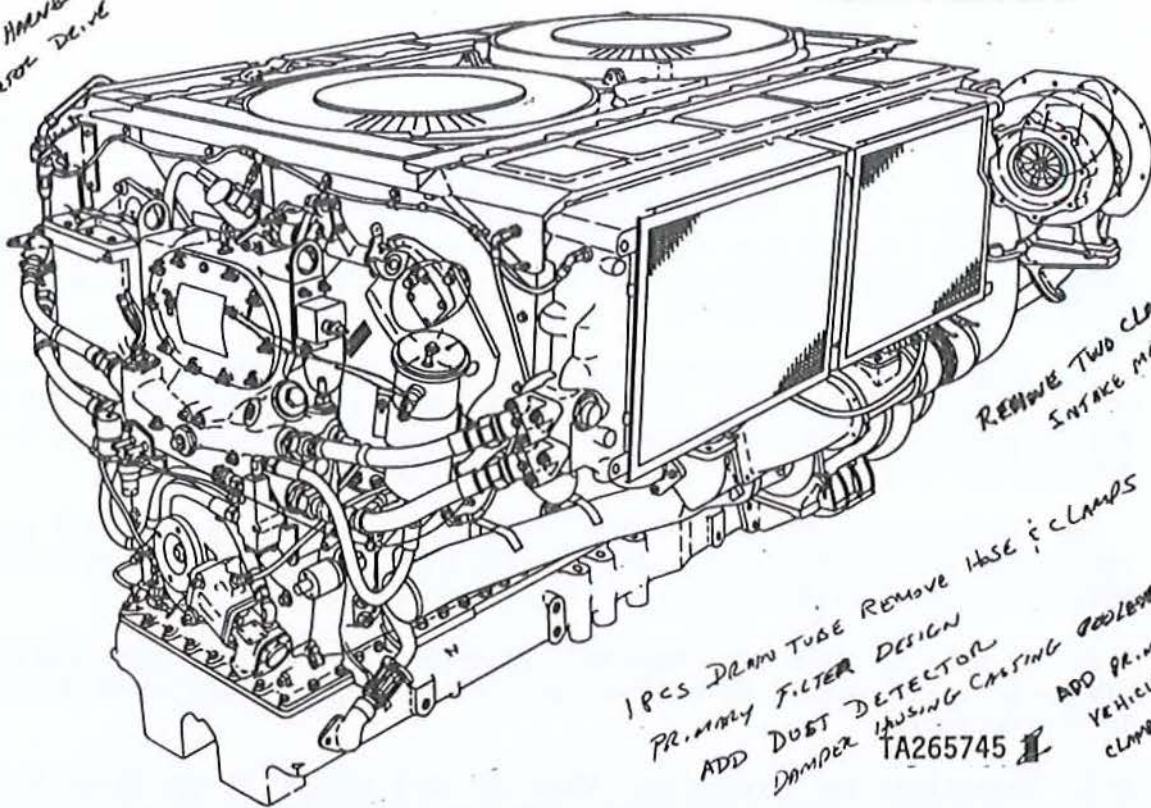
Model AVDS-1790-2DR engine, right front view.
